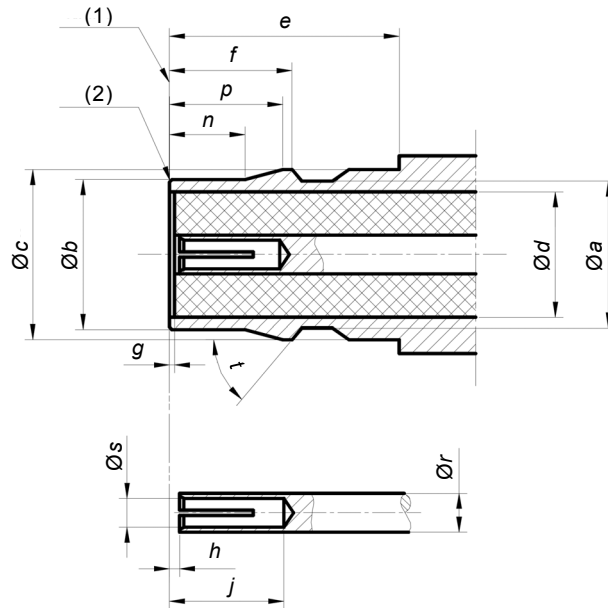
Connector with pin-centre contact (for dimensions and key, see Table 1)
